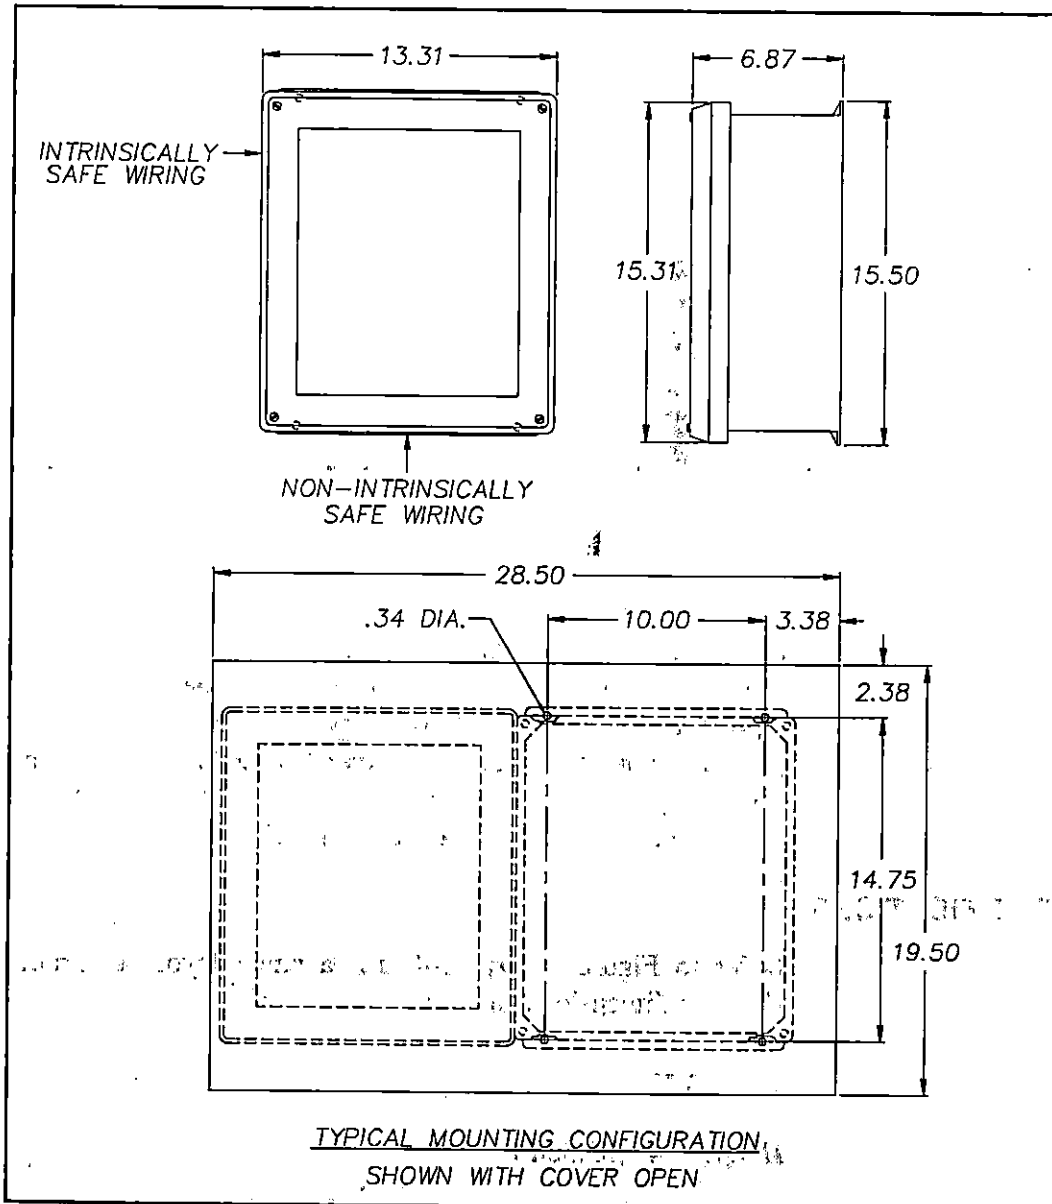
The SITEPRO™ 2000 enclosure showing dimensions, mounting footprint, wiring access and clearance required for door opening.
